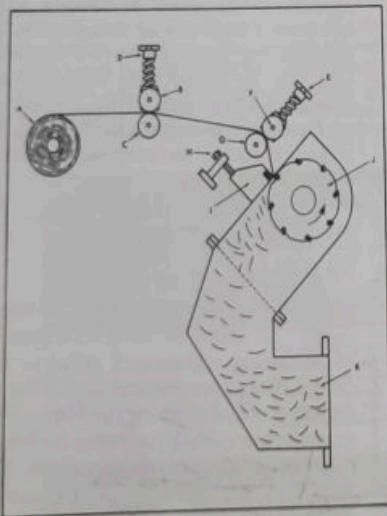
The operating sequence of a staple cutter is as follows: (A) Reel of tow; (B) Top pull roll under spring pressure; (C) Bottom pull roll; (D) Adjusting screw for top pull roll; (E) Adjusting screw for top tension roll; (F) Top tension roll; (G) Bottom tension roll; (H) Bed knife adjusting screw; (I) Bed knife with hardened insert; (J) Rotating cutterhead, with eight fly knives making a shearing cut across the fiber; (K) Discharge chute with flanged outlet for air suction. (Courtesy Taylor, Stiles & Co.)
